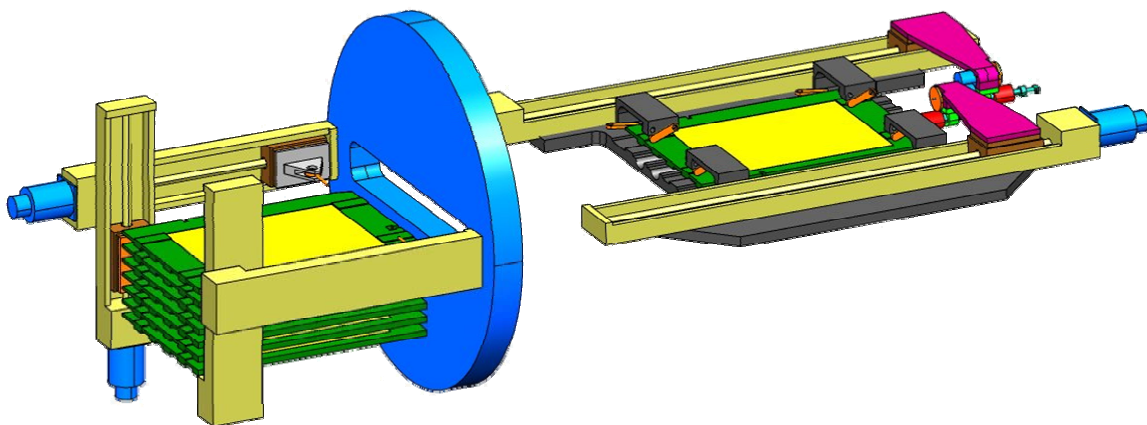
The slit mask transfer axis moves the desired slit mask through the open gate valve (~375mm). The slit mask frame slides into position onto the grabber.
